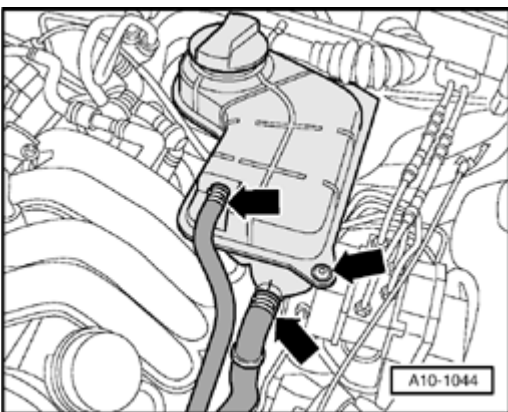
Removing Both Coolant Hoses From Coolant Expansion Tank
